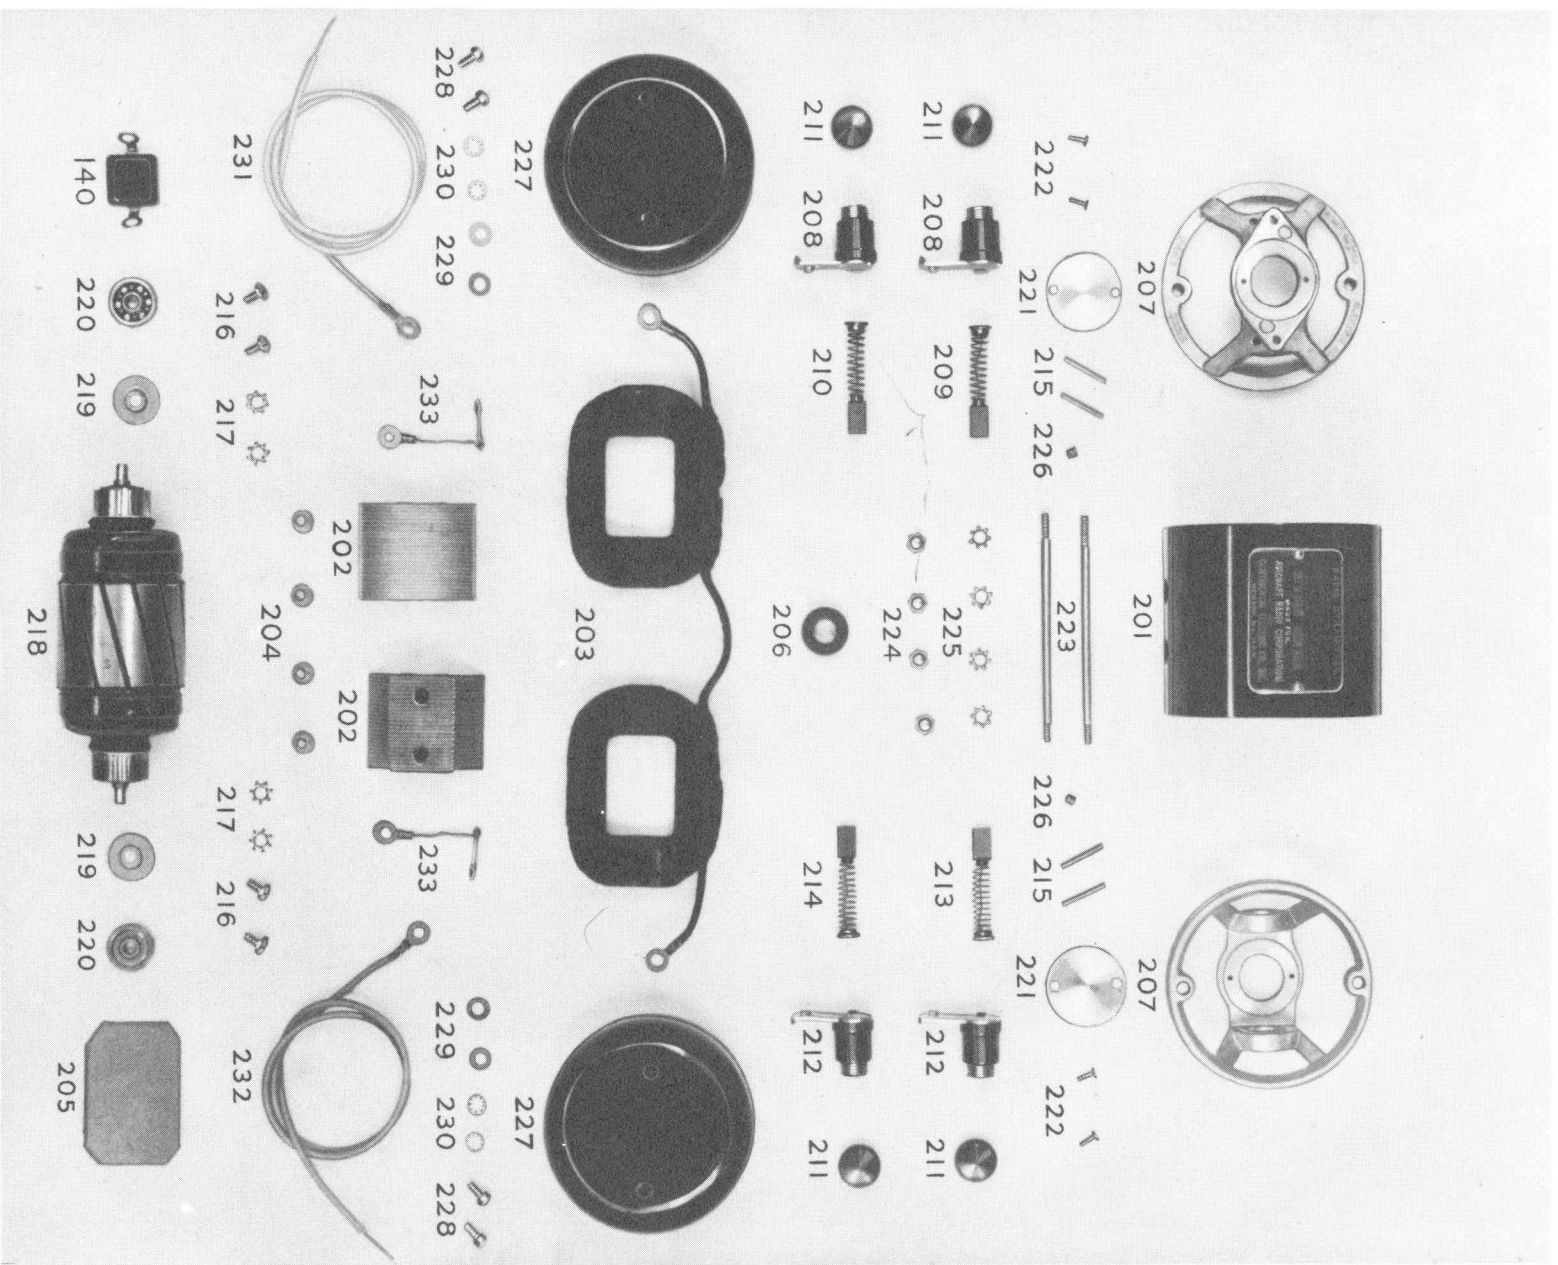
PARTS OF DYNAMOTOR FOR TYPE CBY-21400 RECEIVER DYNAMOTOR UNIT
